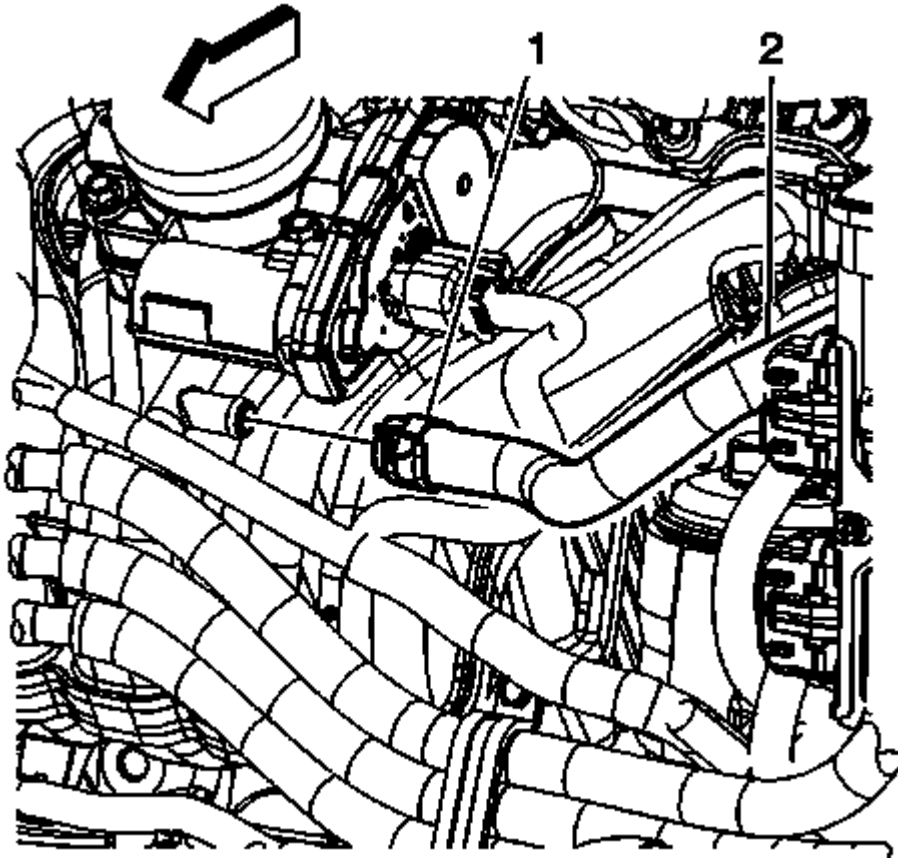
View Of Fuel Feed Pipe Retainer & Fuel Pipe Bracket
